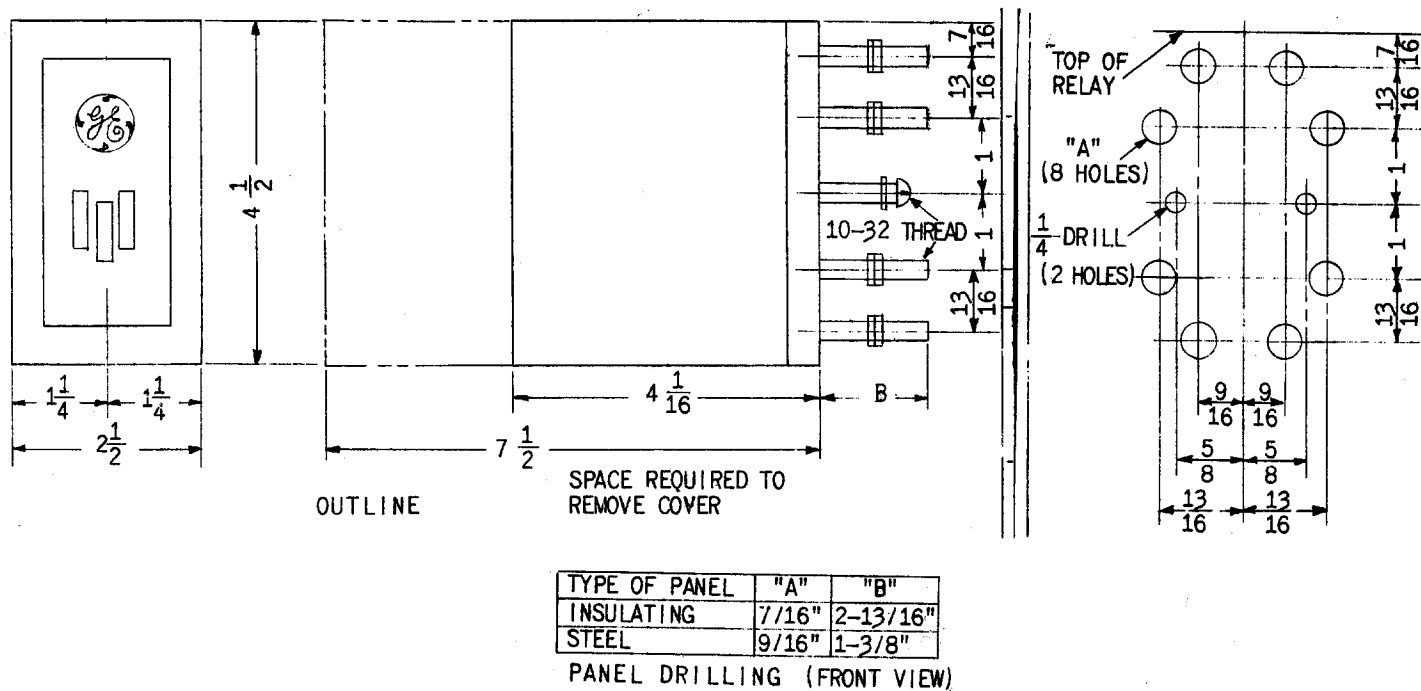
(6077058-19) Outline and Panel Drilling for Surface Mounting of HGA17A and HGA17H Relays.
